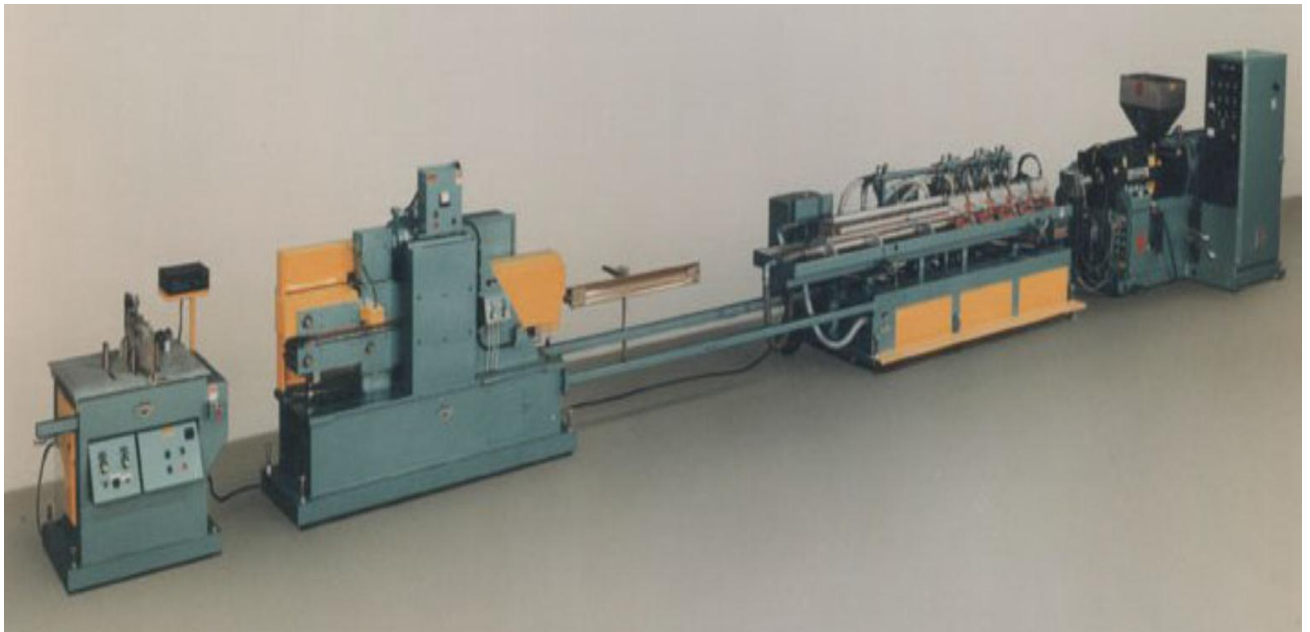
Representative Pipe Extrusion Line, Including The Extruder, Vacuum Tank, Belt Puller, And Cut-off Saw.
